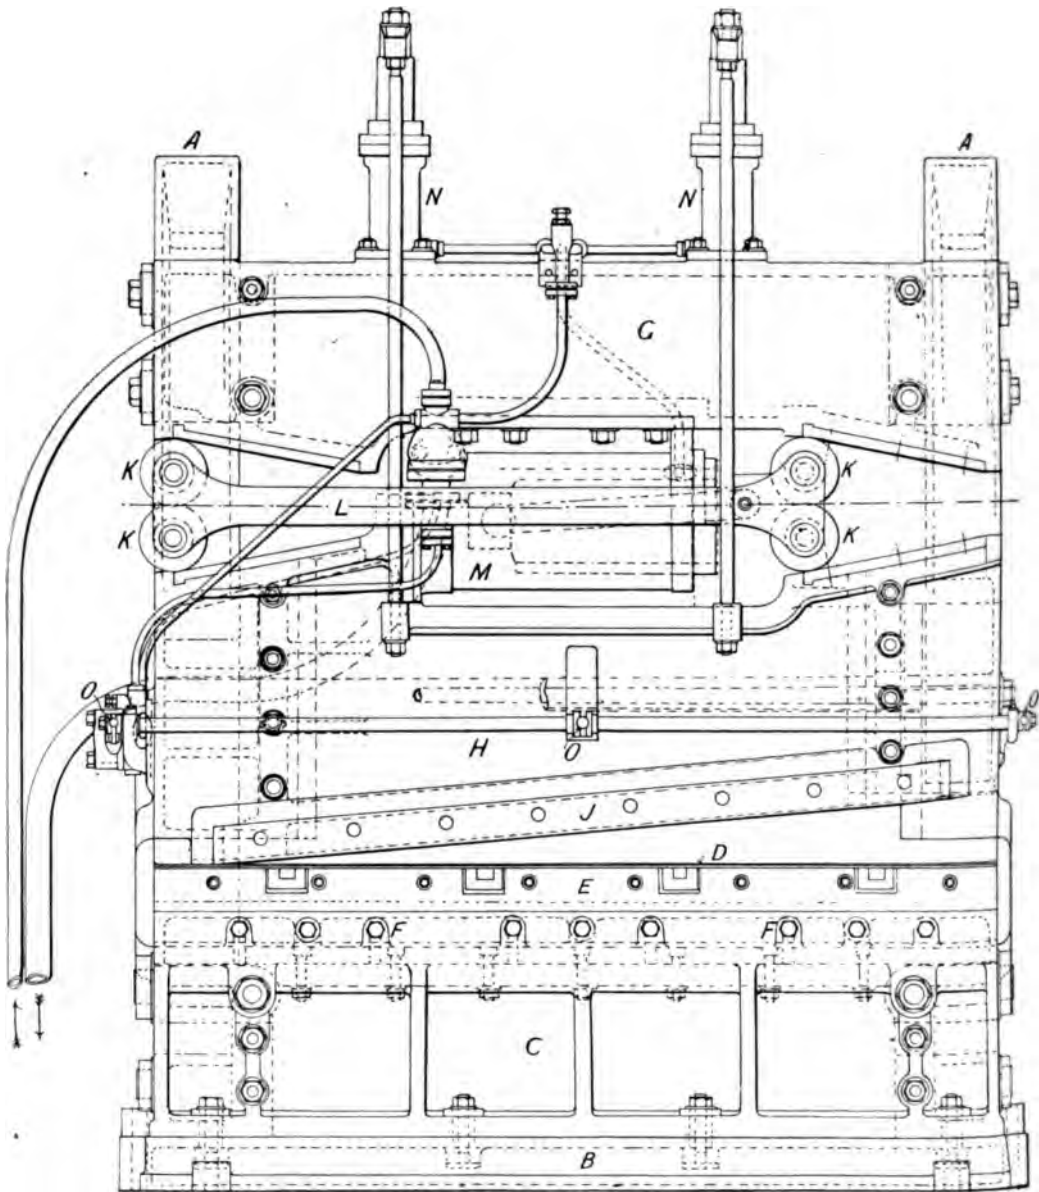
Hydraulic Plate Shears, with Wedge and Roller Gearing. (Front Elevation.)
